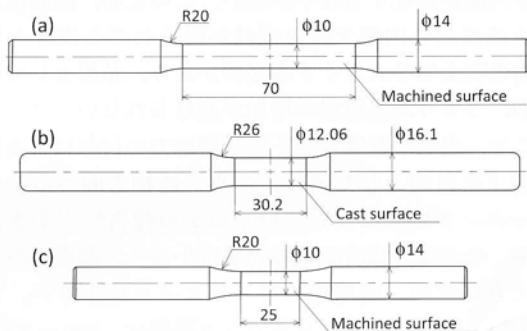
Dimensions of round-bar type specimens for (a) tensile test, (b) fatigue test in as-cast and (c) fatigue test after machining.
